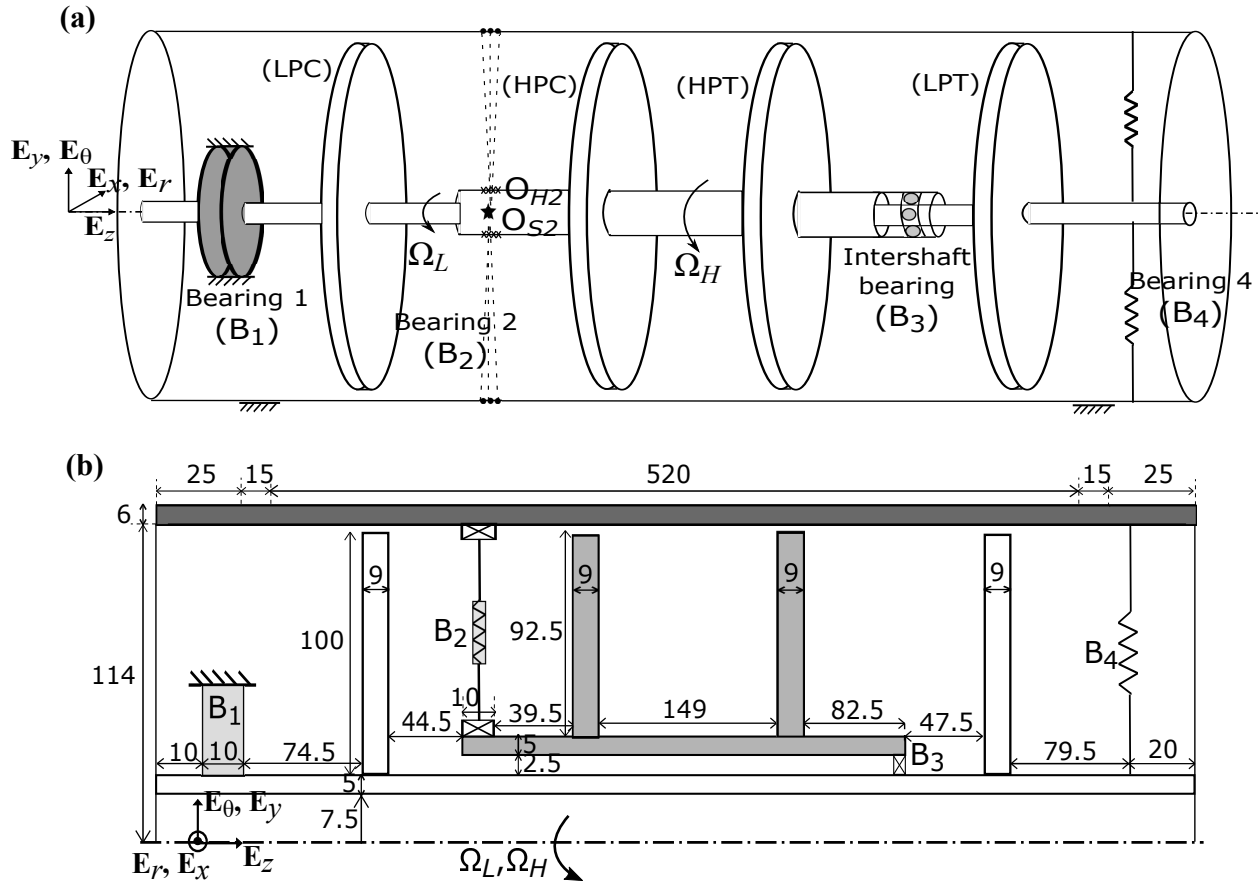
(a) Schematic and (b) Cross-section of the dual rotor-casing model with dimensions in millimeters. The low-pressure (LP) and high-pressure (HP) systems consists of a shaft, a compressor disk (LPC, HPC), and a turbine disk (LPT, HPT). The rotation speeds of the LP and HP systems are Ω_L and Ω_H , respectively. The LP shaft is supported by an elastic foundation bearing B_1 and two discrete stiffnesses shown by B_4 . The HP shaft is coupled to the casing through surface constraints and a bearing stiffness model B_2 . The radial, time-varying stiffness element B_3 couples the LP and HP shafts.
